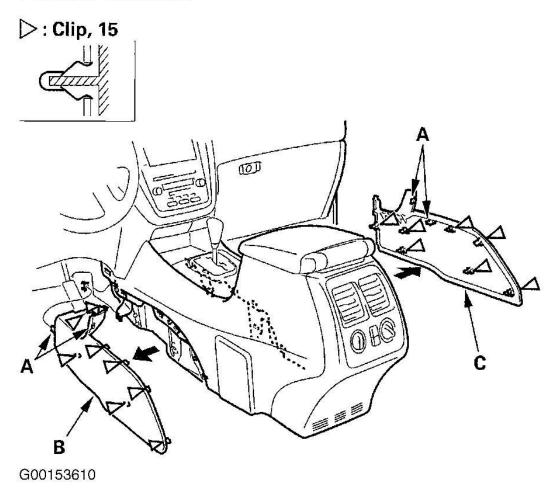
Removing Console Side Trim Panels Courtesy of AMERICAN HONDA MOTOR CO., INC.
